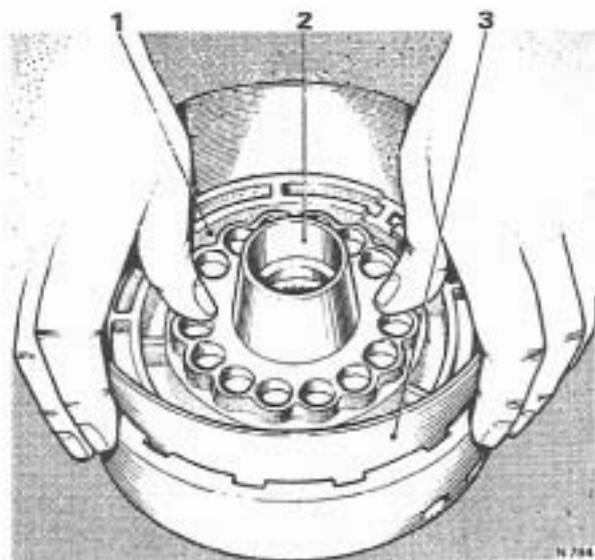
FITTING THE FORWARD CLUTCH PISTON
